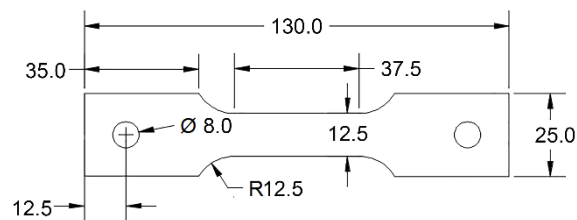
Sample geometry of the DSA tensile bars with dimensions shown in millimeters.
